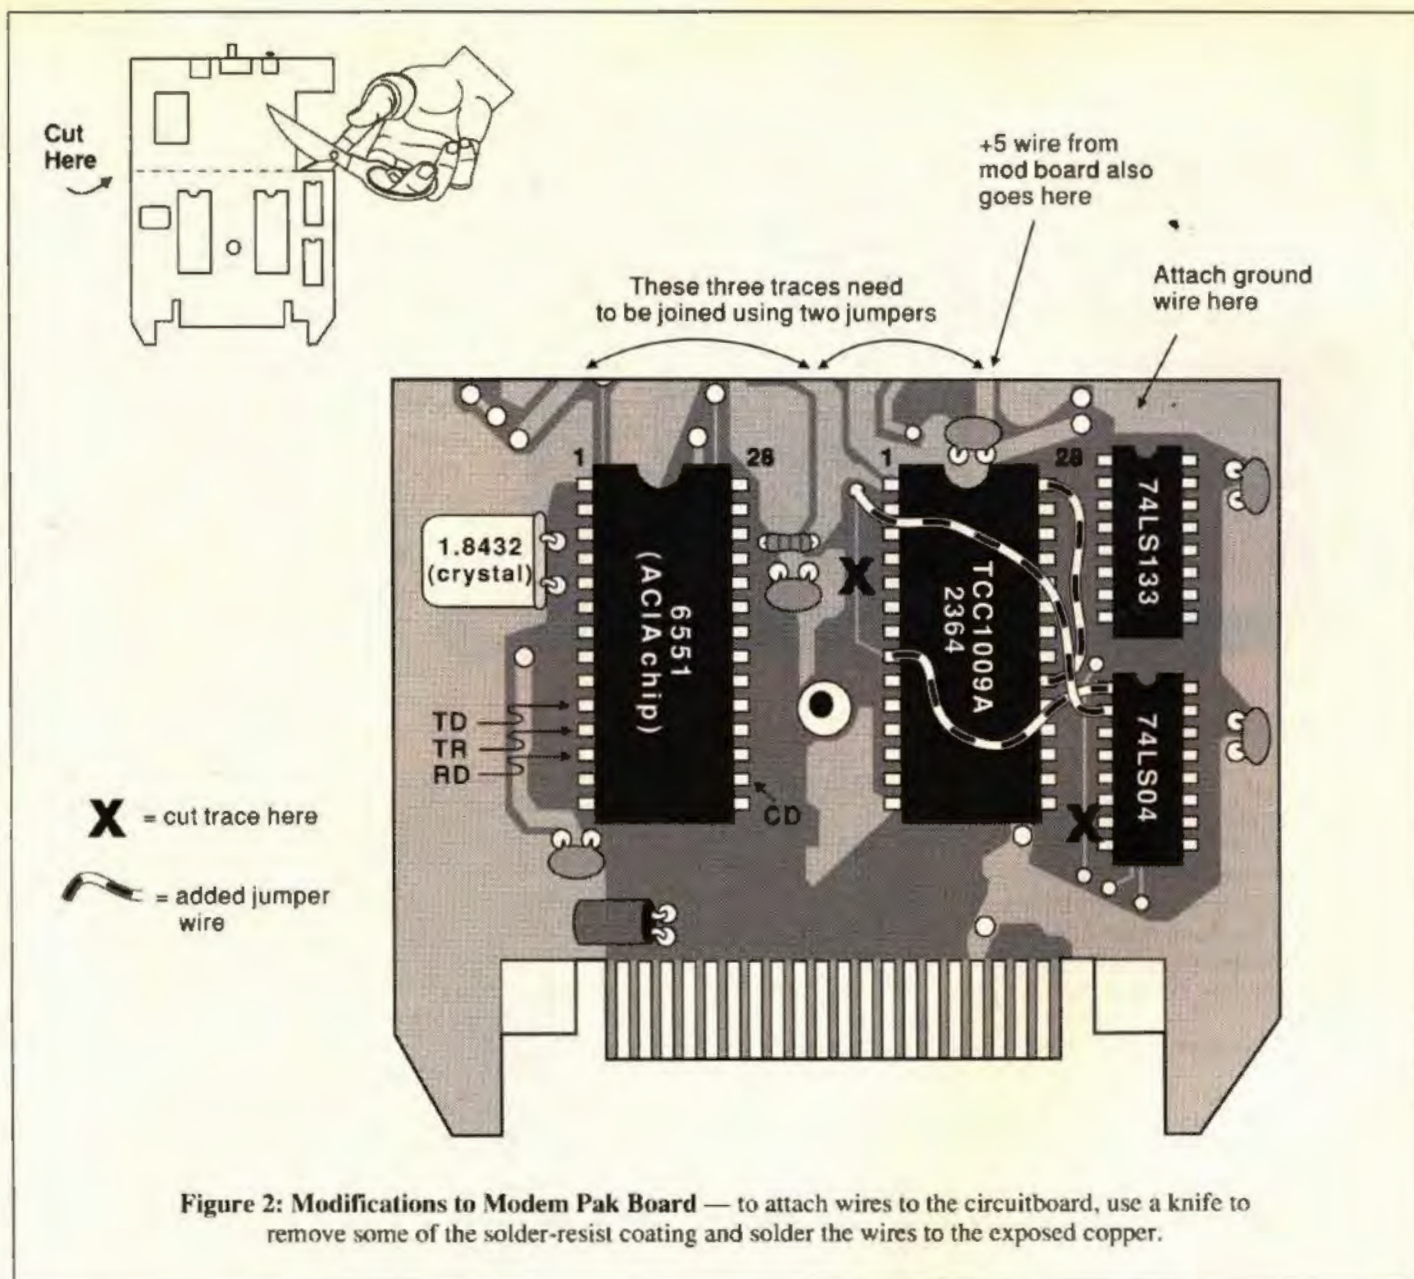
Modifications to Modem Pak Board — to attach wires to the circuitboard, use a knife to remove some of the solder-resist coating and solder the wires to the exposed copper.
